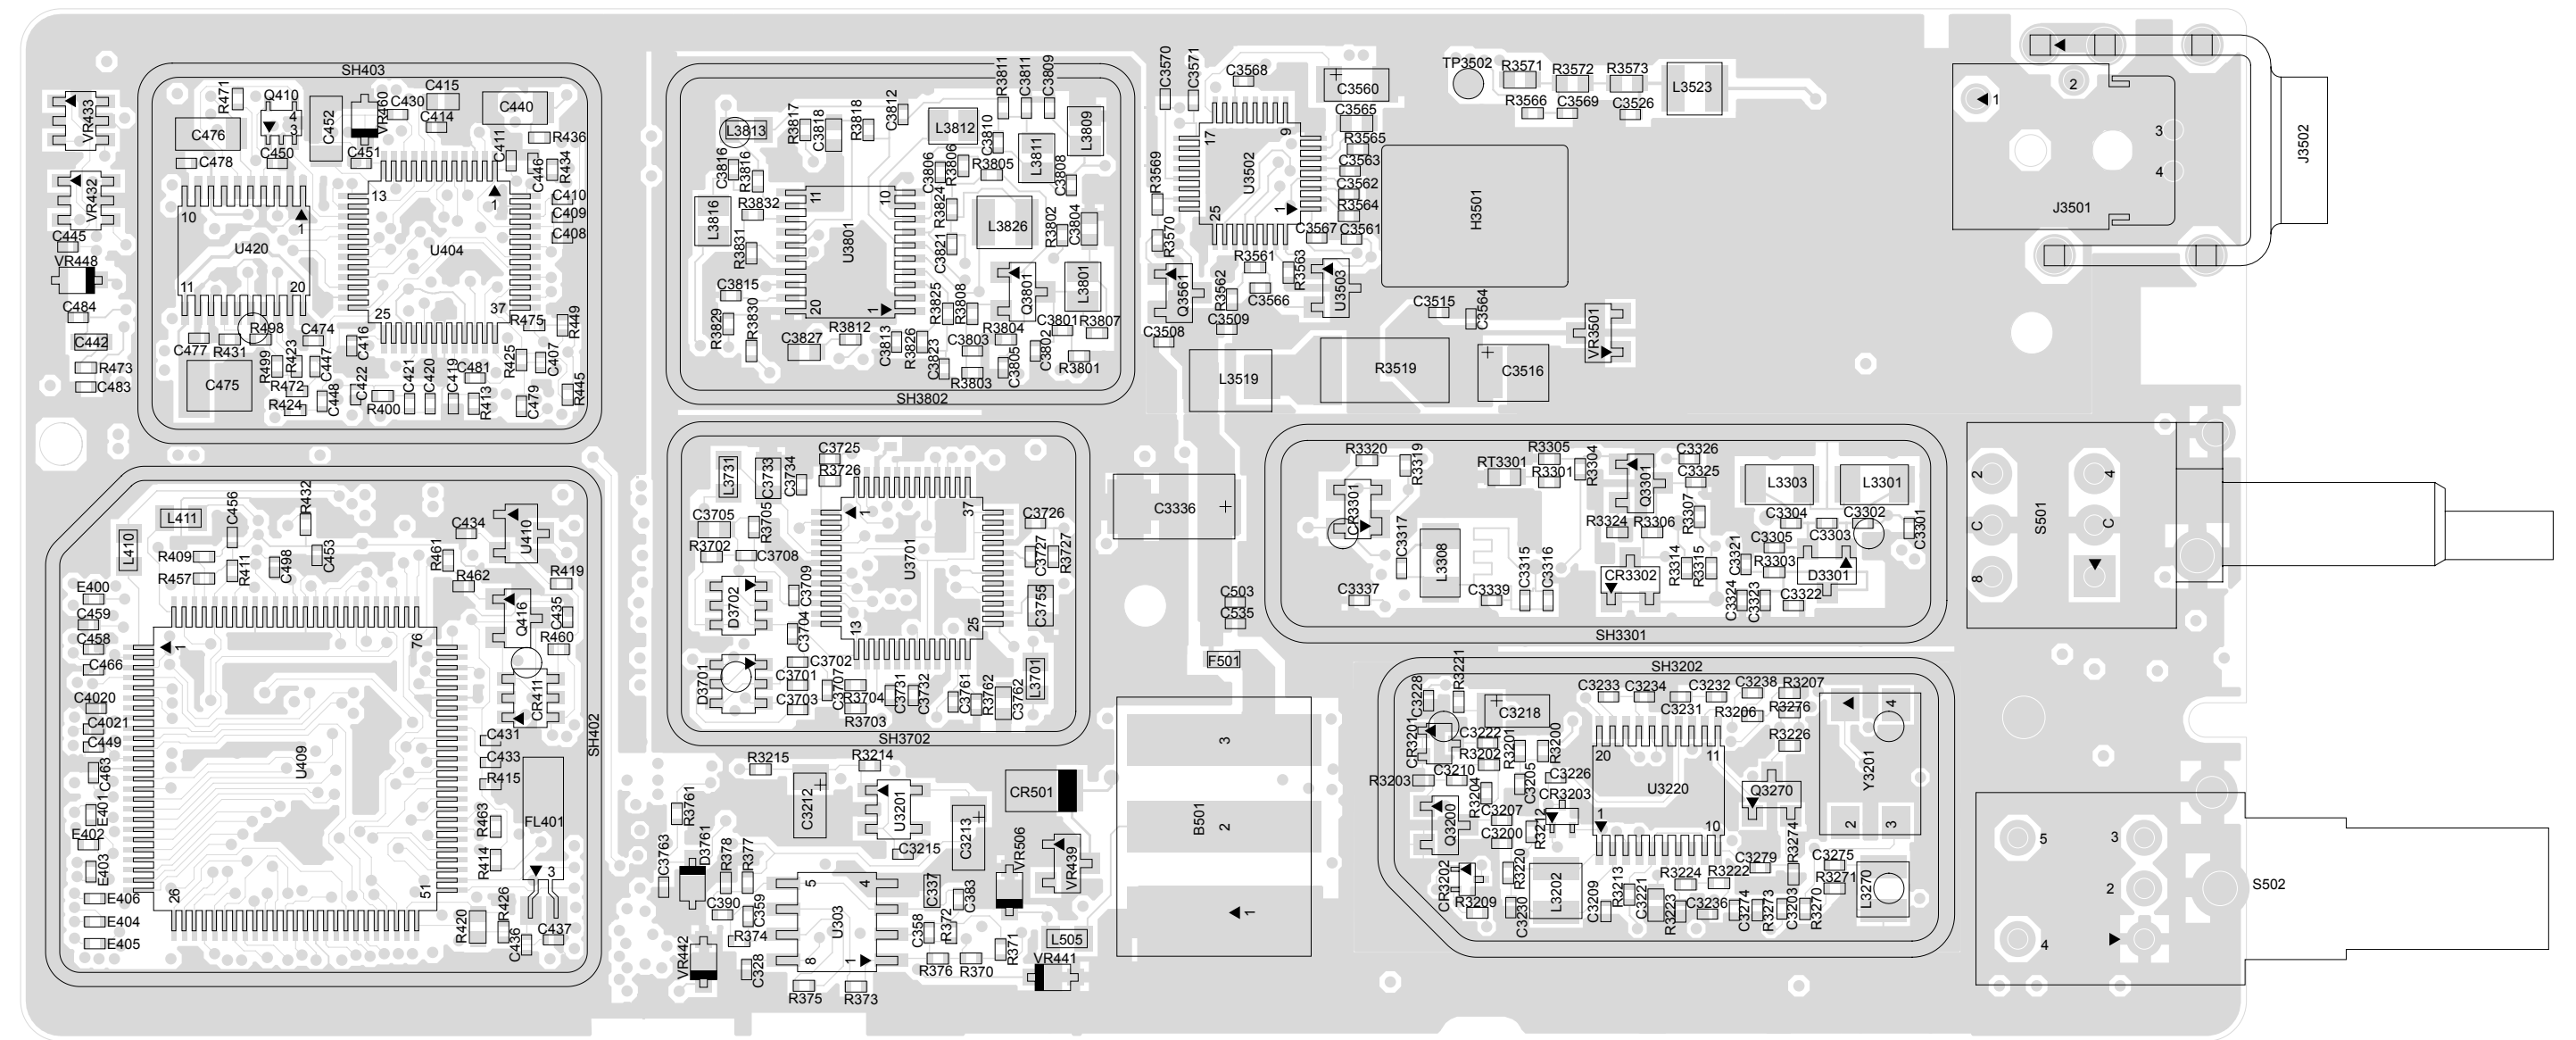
VHF (136–174 MHz) Main Board Bottom Side PCB 8486473Z04 rev. C
